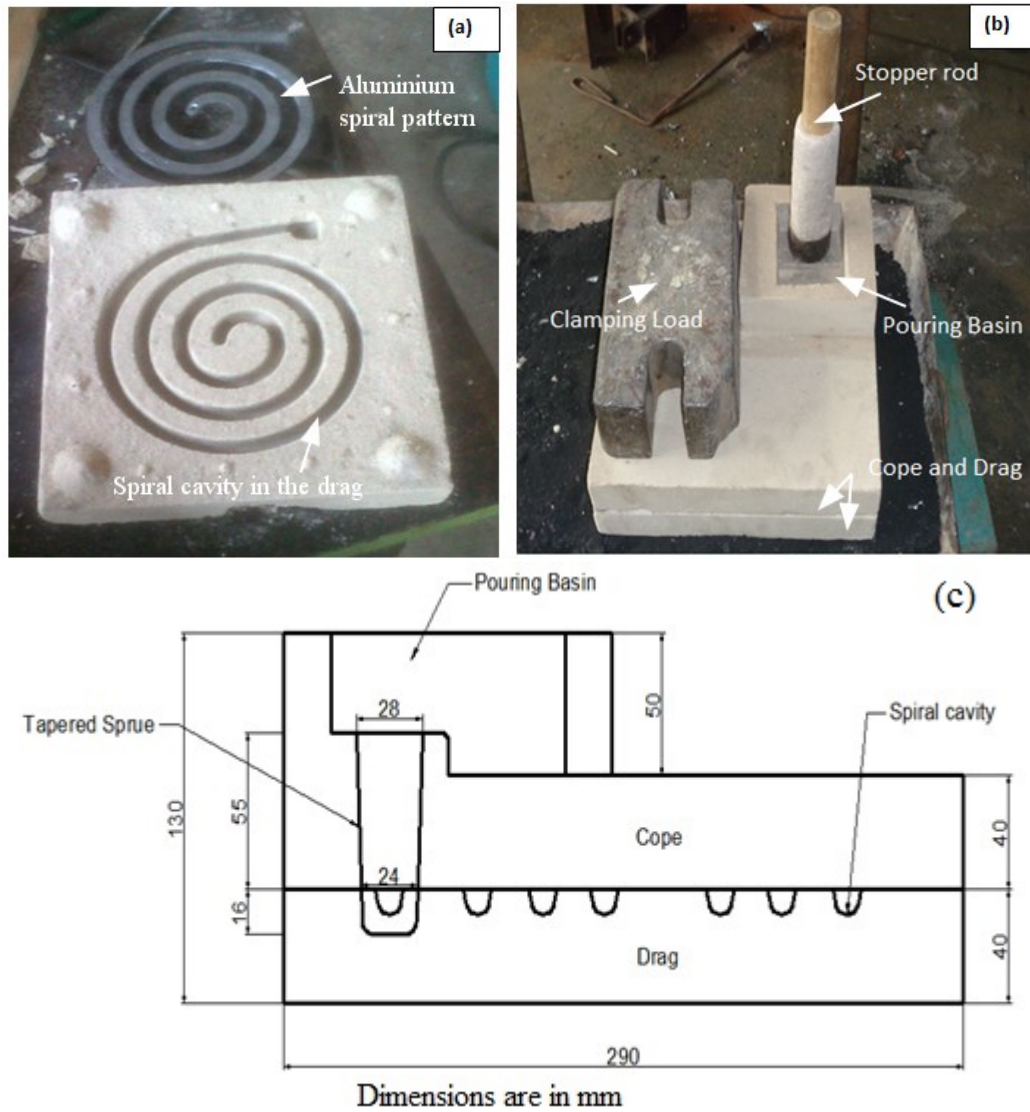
(a) The spiral pattern and drag with spiral cavity, (b) The complete mould of the fluidity test and (c) The dimensional detail of complete system of fluidity testing mould.
